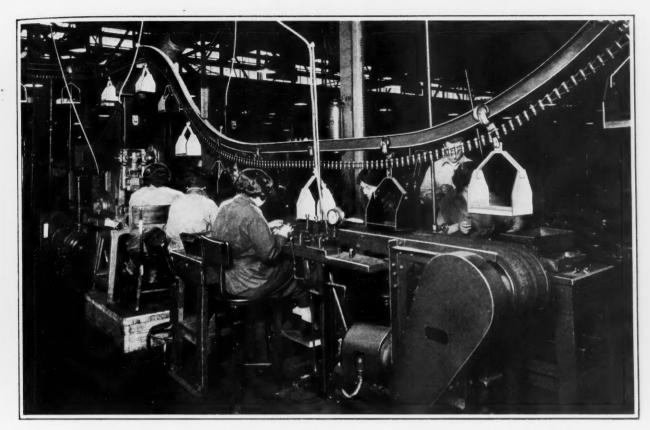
End of the Wing Line, Showing a Group of Inspectors who Place the Parts in Baskets by which they are Conveyed to the Main Assembly Lines
